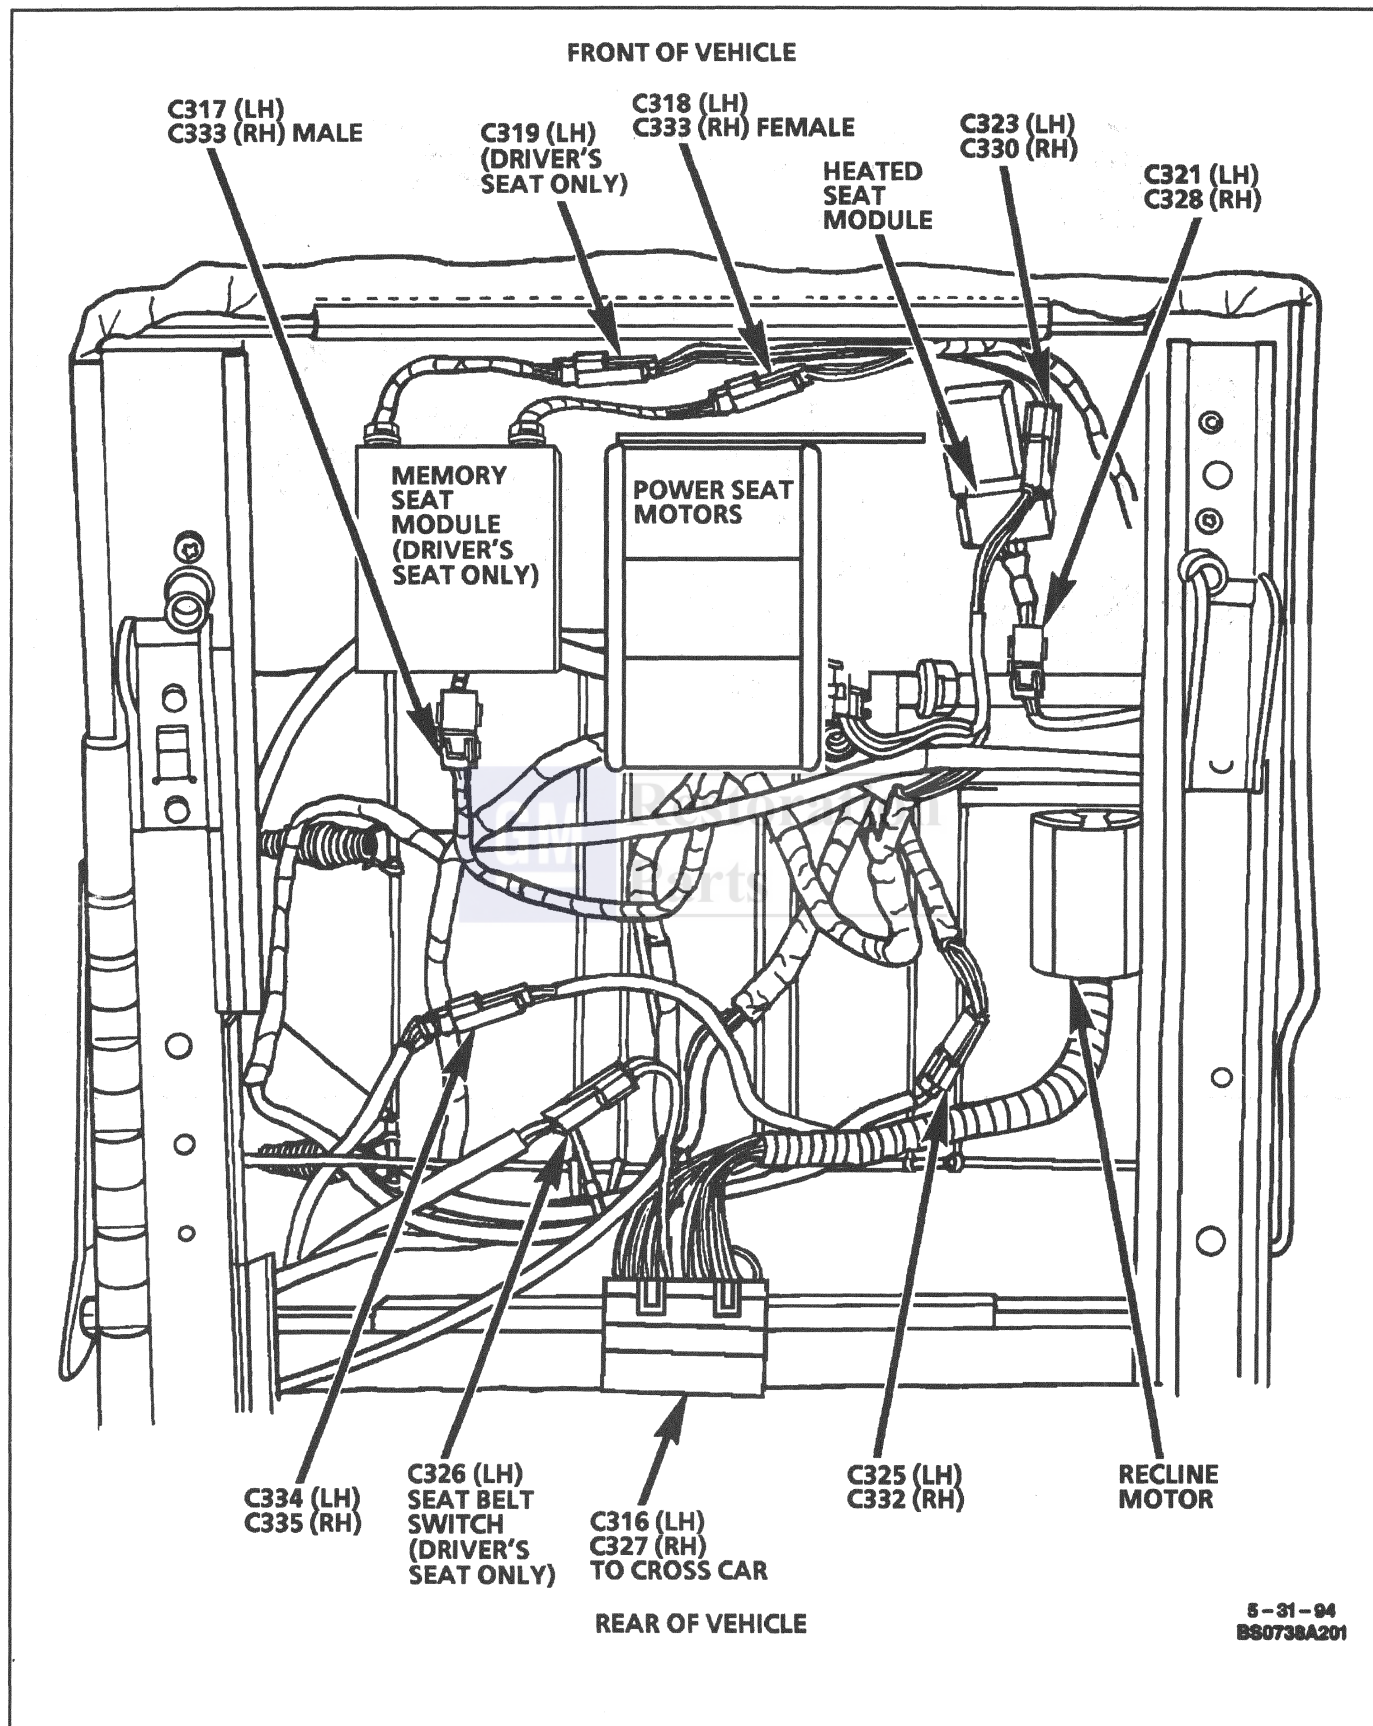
Underside of Driver Seat, Passenger Seat Similar
